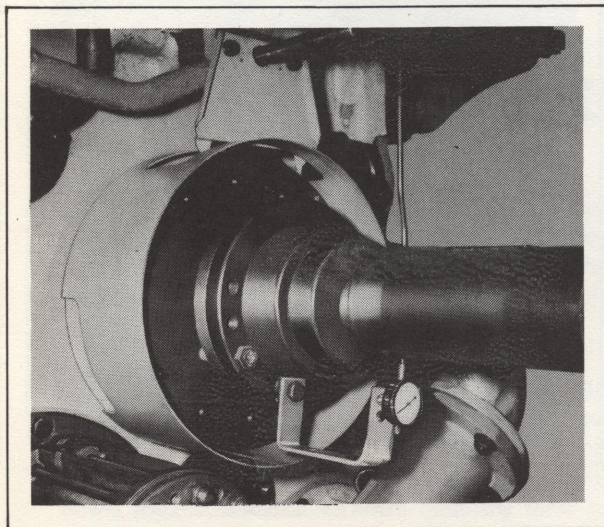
CHECKING ALIGNMENT BETWEEN DRIVESHAFT AND DIESEL ENGINE.
